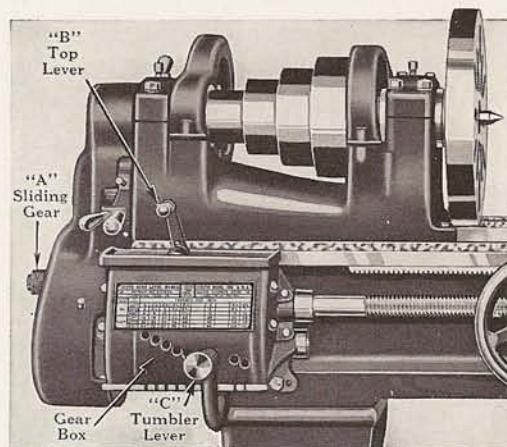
Quick Change Gear Mechanism used on all South Bend Quick Change Gear Lathes. (See Gear Box Description on Page 41)
